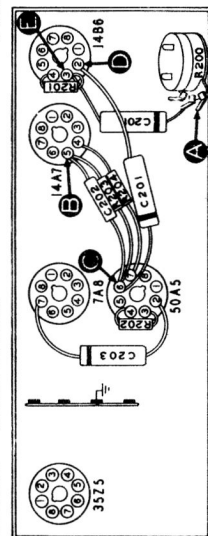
BOTTOM VIEW, SHOWING SECTION 2 TEST POINTS
